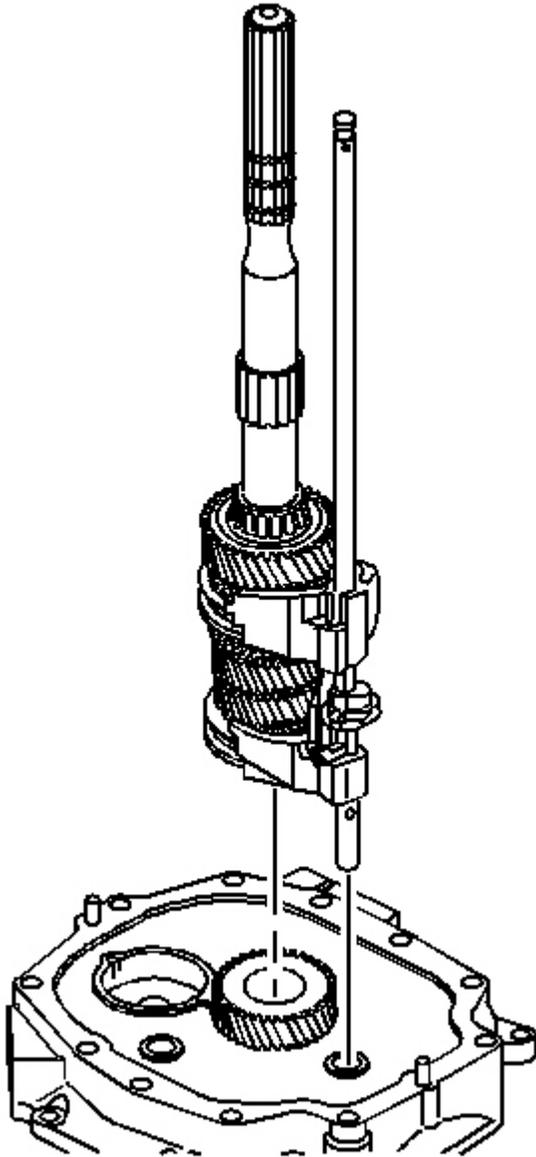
Installing/Removing Mainshaft & Shift Shaft Assembly
